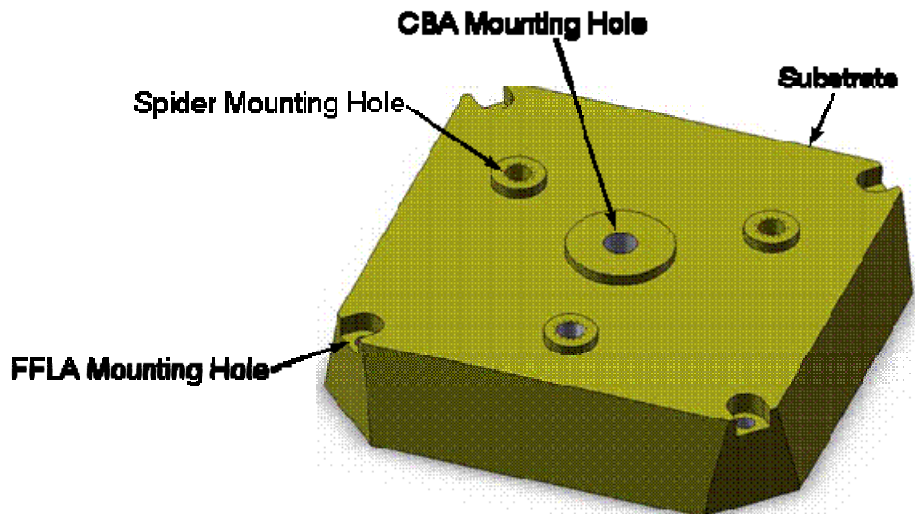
This view of the rear side of the CCD package shows the spider, FFLA, and CBA mounting features. Note that the following components are not shown in this figure: vacuum electronics interconnect and auxiliary components.
